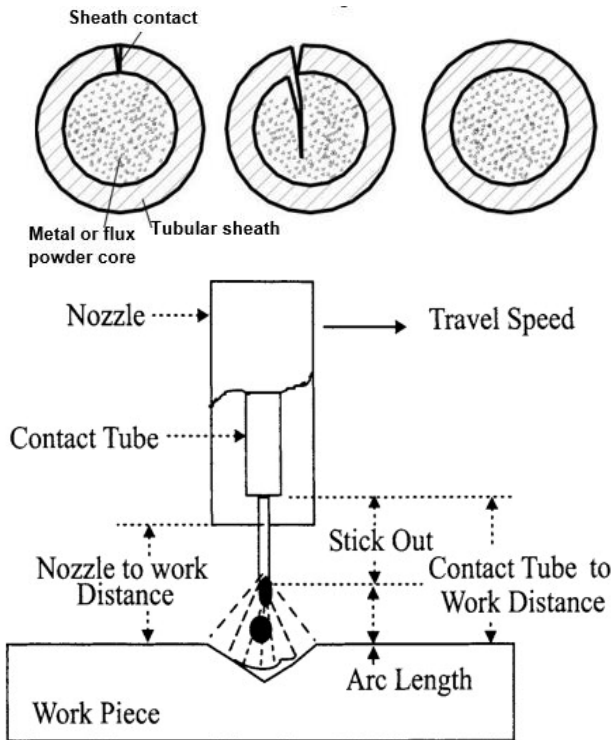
Schematic view of metal and flux or metal powder cored wires and the GMA welding terminology [1, 2, 13-16]
